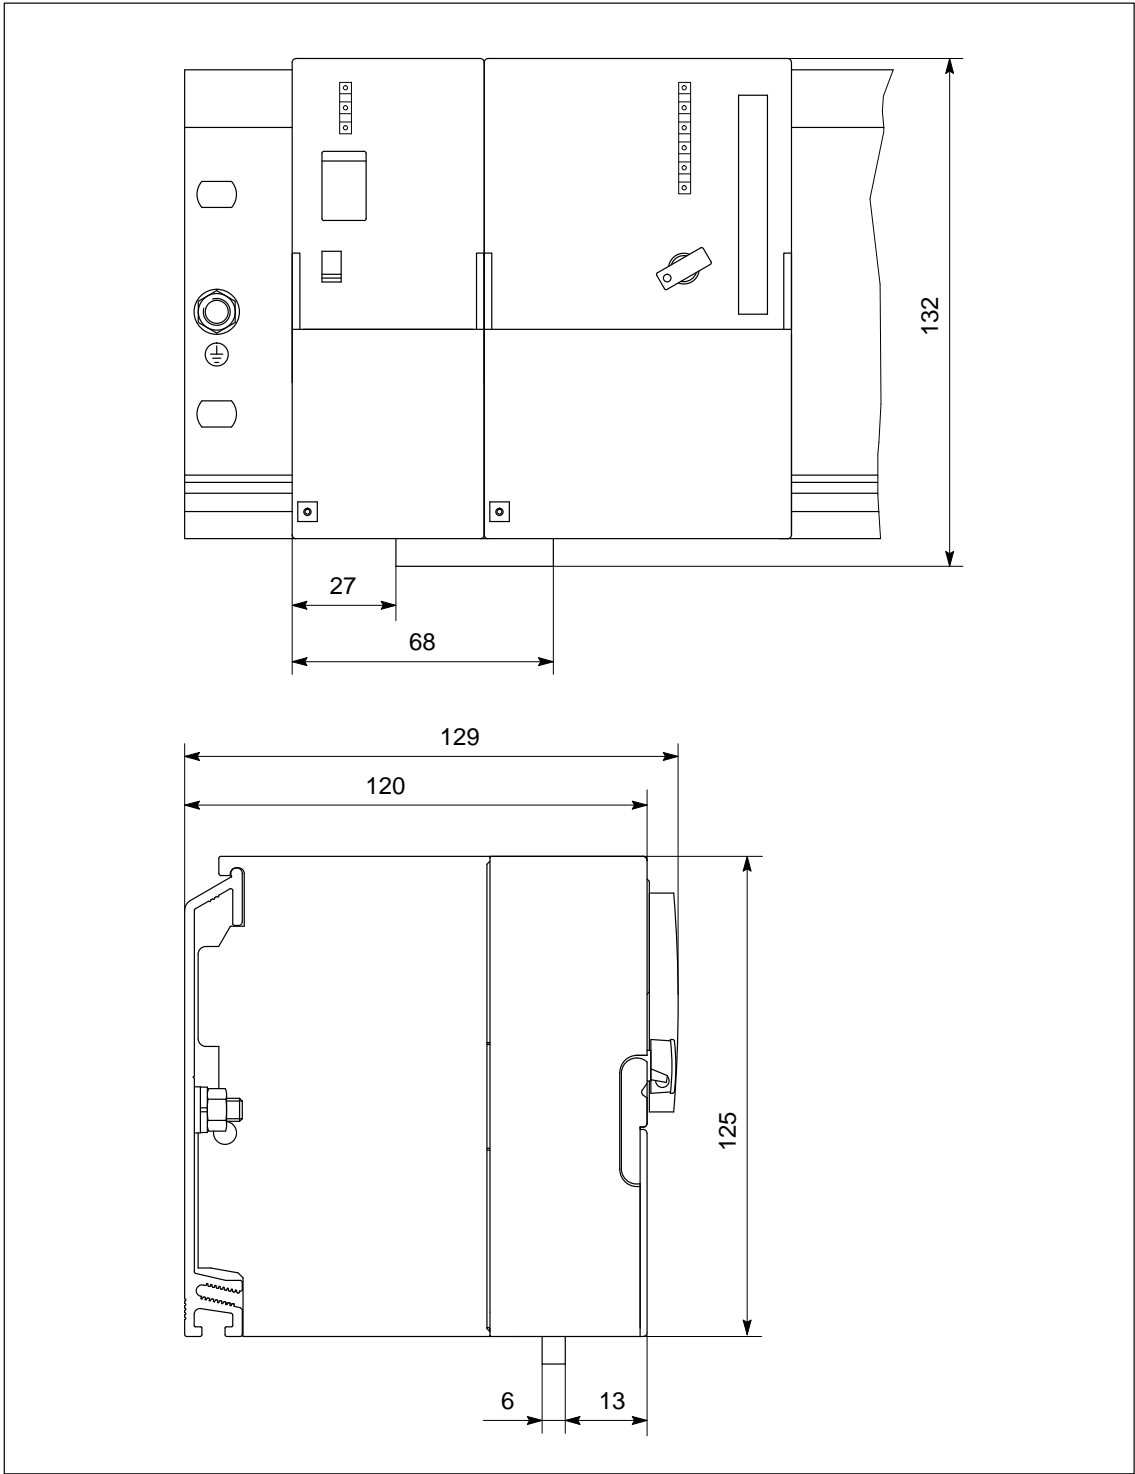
Dimension Drawing of Power Supply Module PS 307, 5 A with Connecting Terminal and CPU 388-4 with Memory Card Inserted
